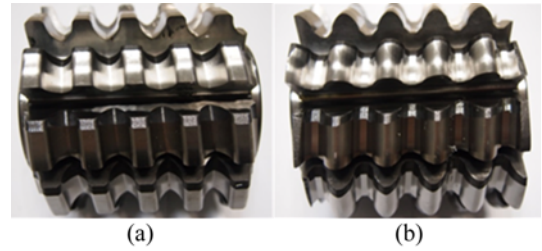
Hobbing cutters for the gear pair: (a) hobbing for the pinion and (b) hobbing for the gear
